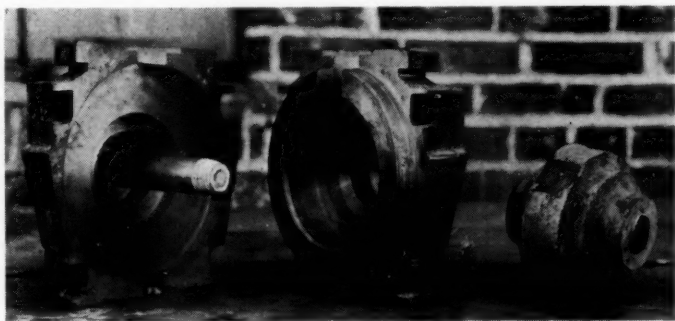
PHOTOGRAPH OF TWO HALVES OF THE MOLD SHOWING CORE PINS. A CASTING IS SHOWN AT THE RIGHT.
